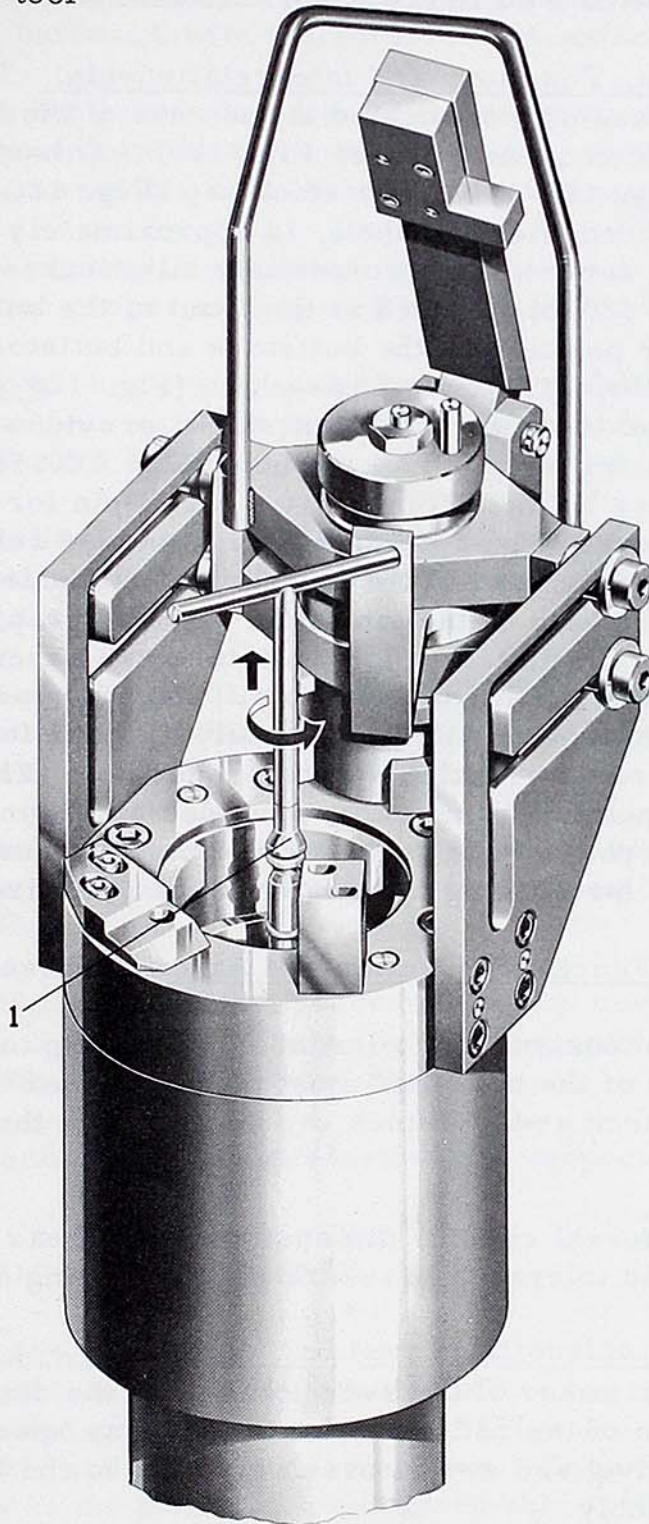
Extraction of the Barrel and Barrel Extension Assembly from the Test Firing Fixture.
